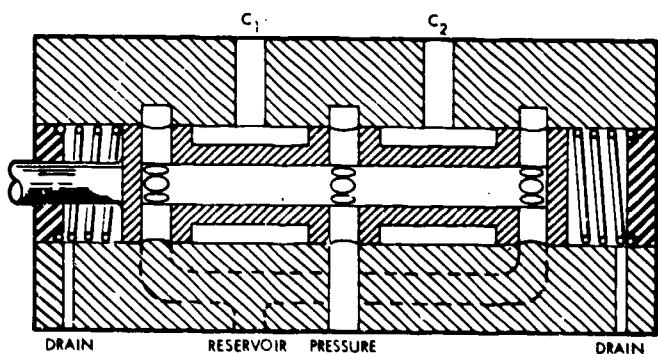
Three-Position, Four-Way, Hollow Spool Valve With External Drain and Spring Centering Mechanism
